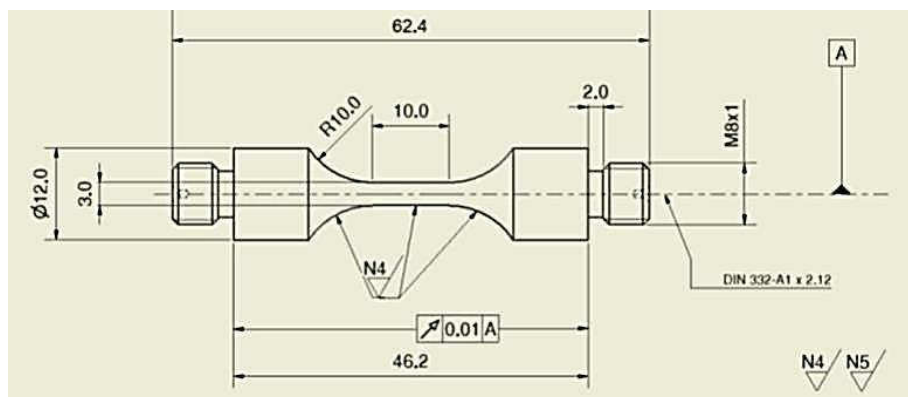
Specimen geometry for $R > 0$ fatigue tests. [Til13]
